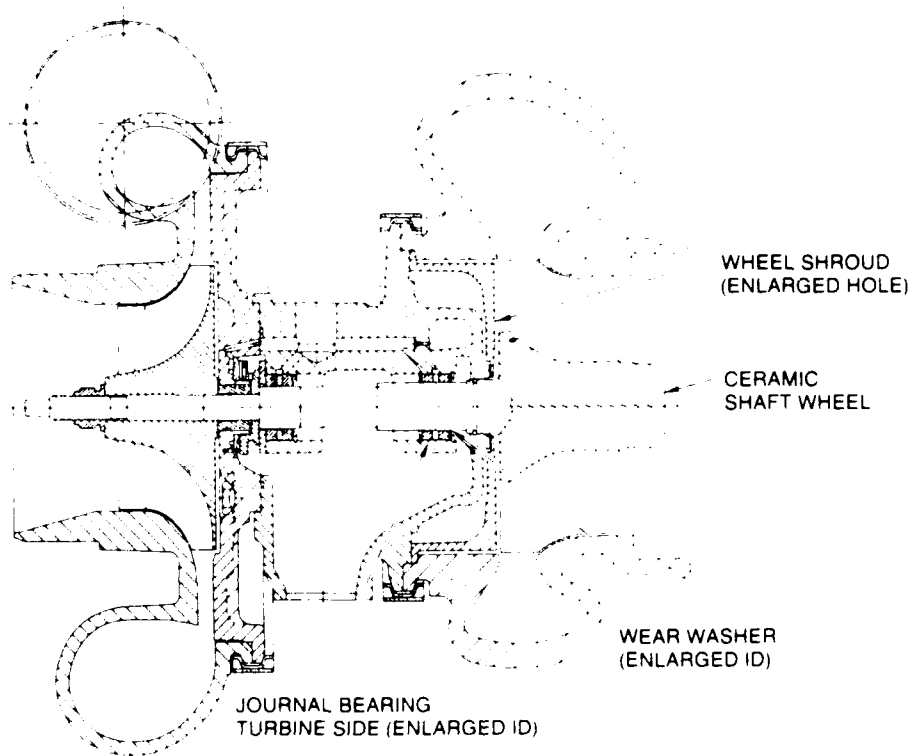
Design Modifications to Accommodate Ceramic Shaft Wheel in TV81
